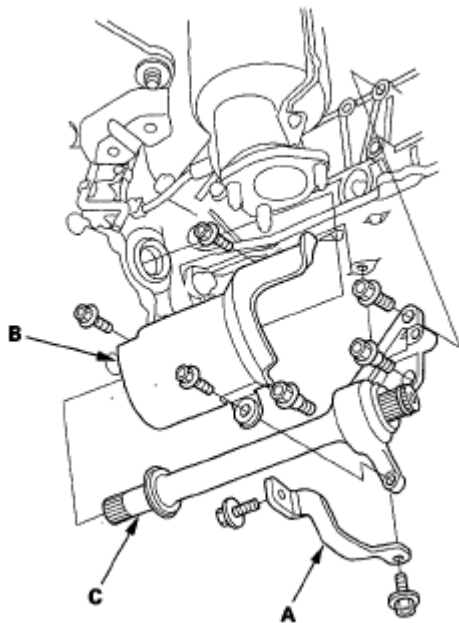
Identifying Intermediate Shaft, Exhaust Manifold Bracket And Heat Shield
